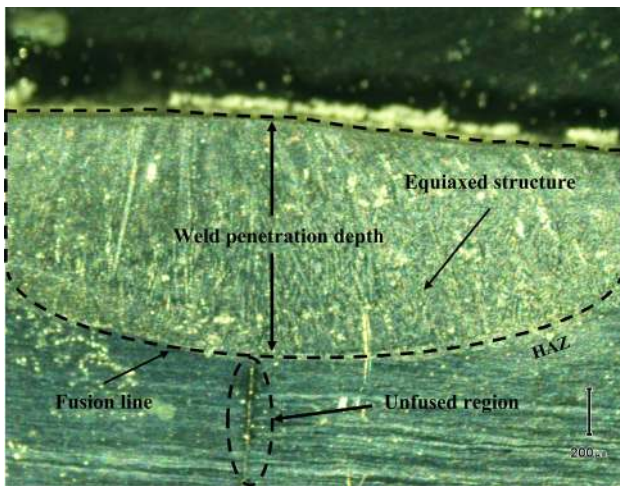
Optical micrograph showing fused, unfused regions and weld penetration depth of TIG welding with cryogenic liquid
